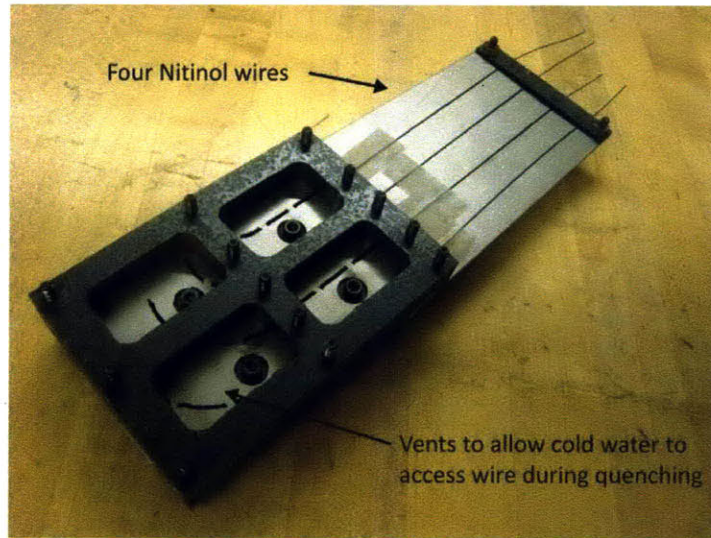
Nitinol Quench Fixture with straight Nitinol wire assembled
